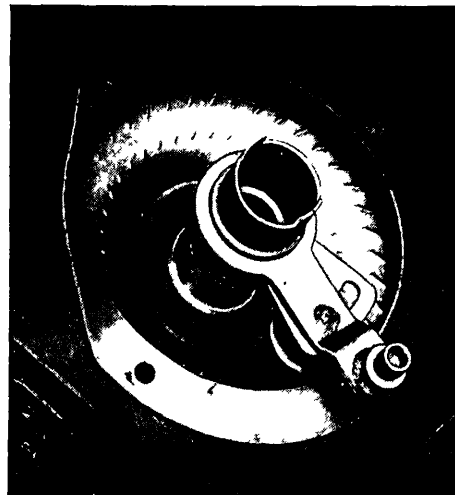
Spline alignment fixture inserted in torque converter. 1950-52
